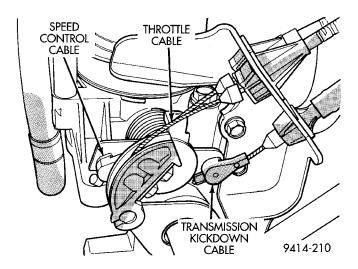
Throttle Body Cables Attachment to Throttle Body
